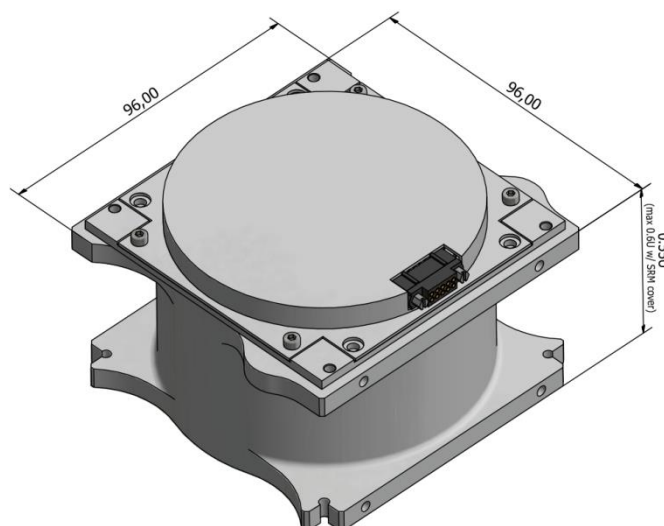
Final assembly of deorbit sail container and Sail Release Mechanism, main system dimensions shown
